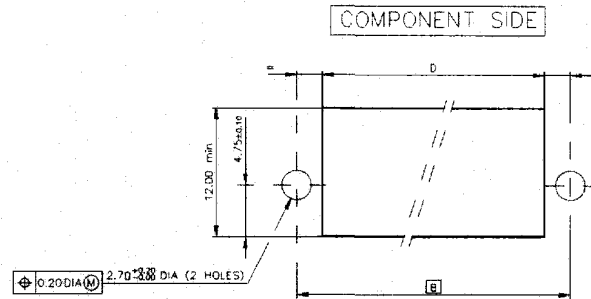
MOUNTING PATTERN, IN PARALLEL ARRANGEMENT BOARD-TO-BOARD CONNECTION, (RECOMMENDED PCB HOLE CONFIGURATION).
